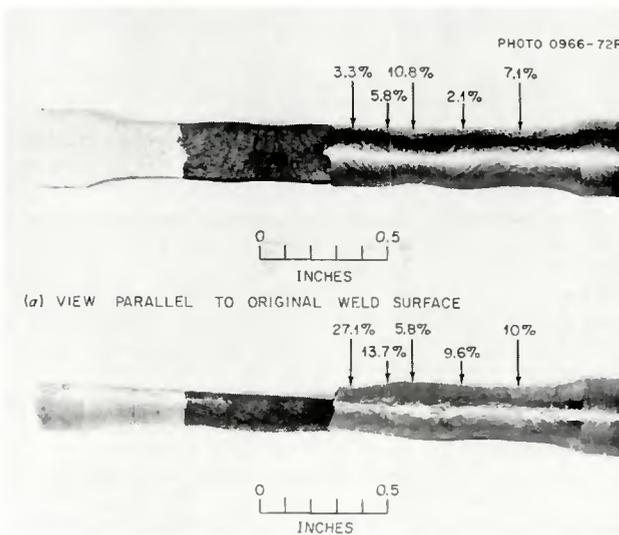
Two views of the gage section of a transverse weld specimen pulled at room temperature. The left piece has been cut, polished, and macroetched to reveal weld metal and base metal. The pieces are shown with a 180 deg relative axial rotation
